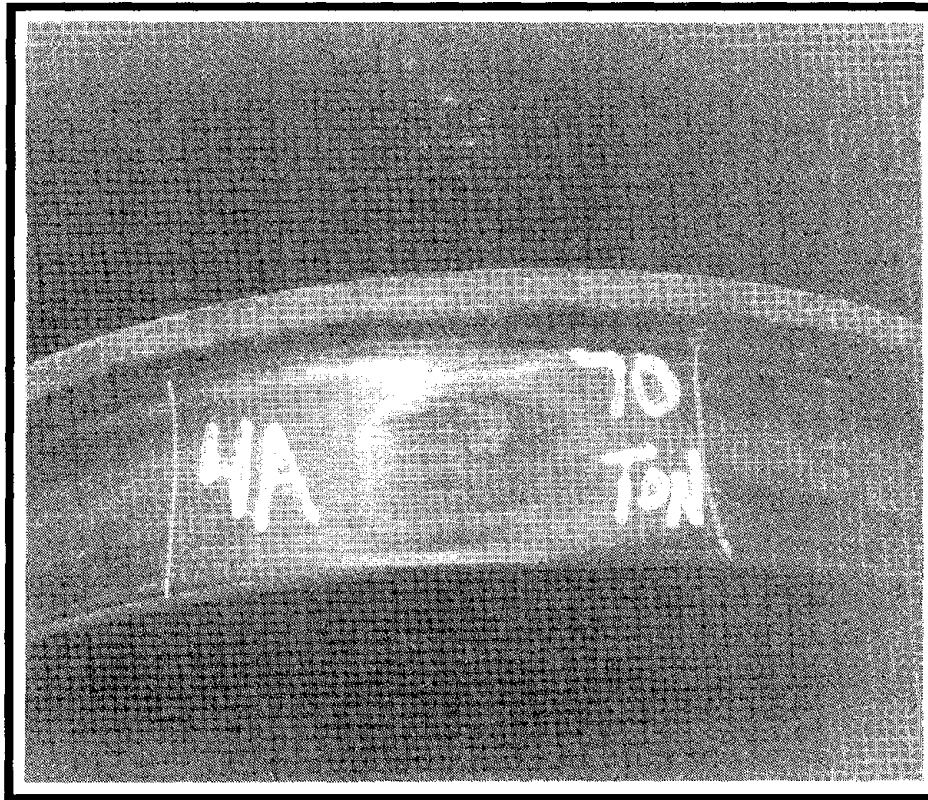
Slid Flat Wheel Tread Defect - Left Wheel
